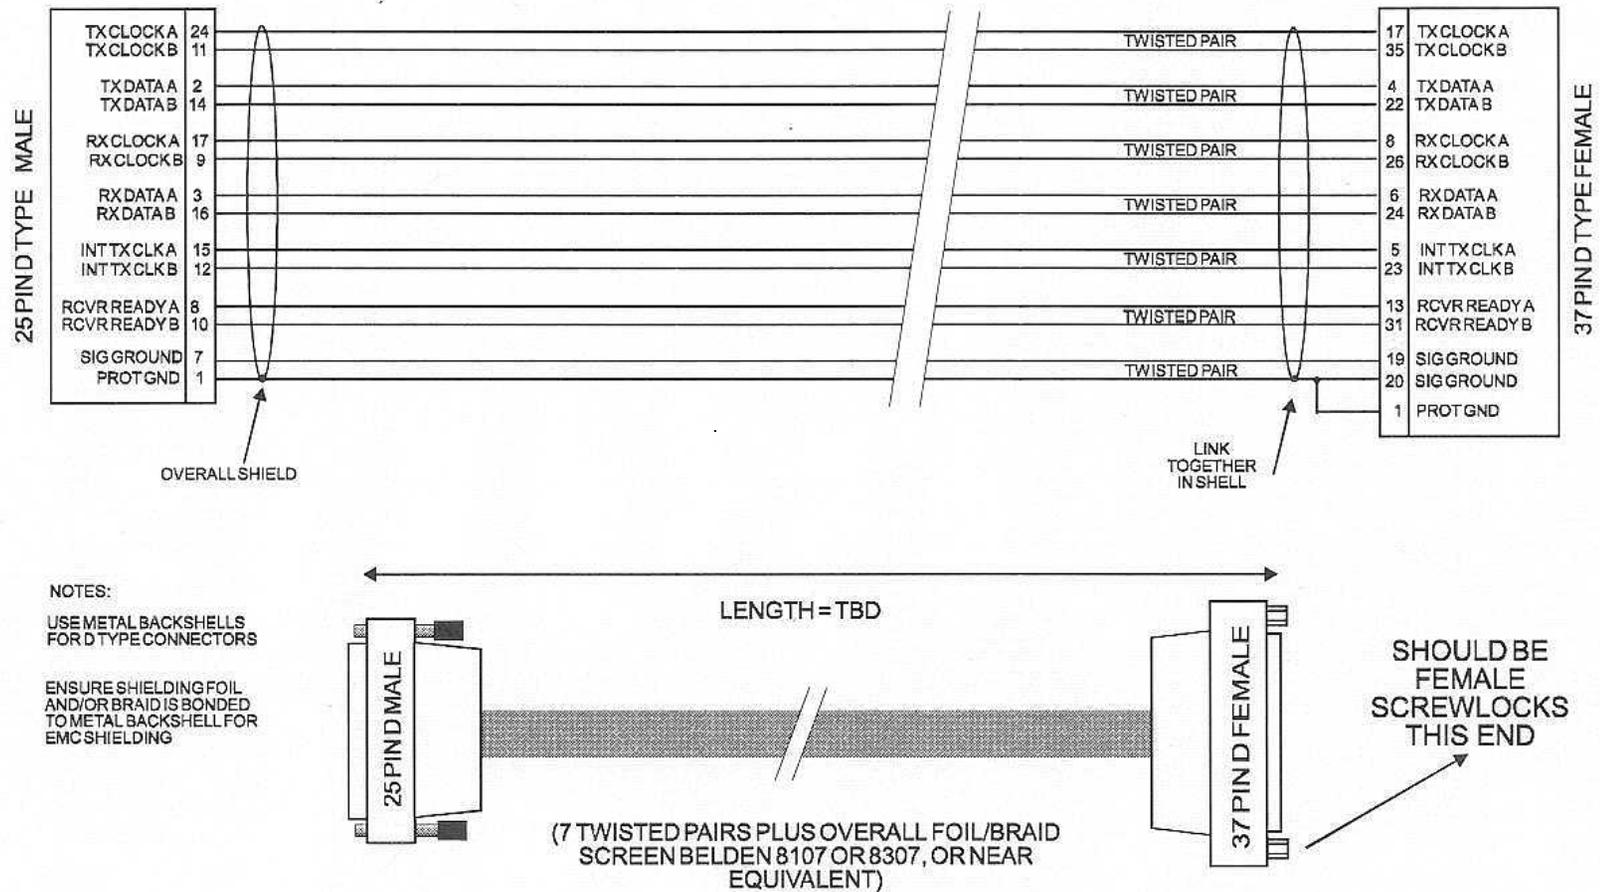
DCE Conversion Cable: RS-530 to RS-422/449
